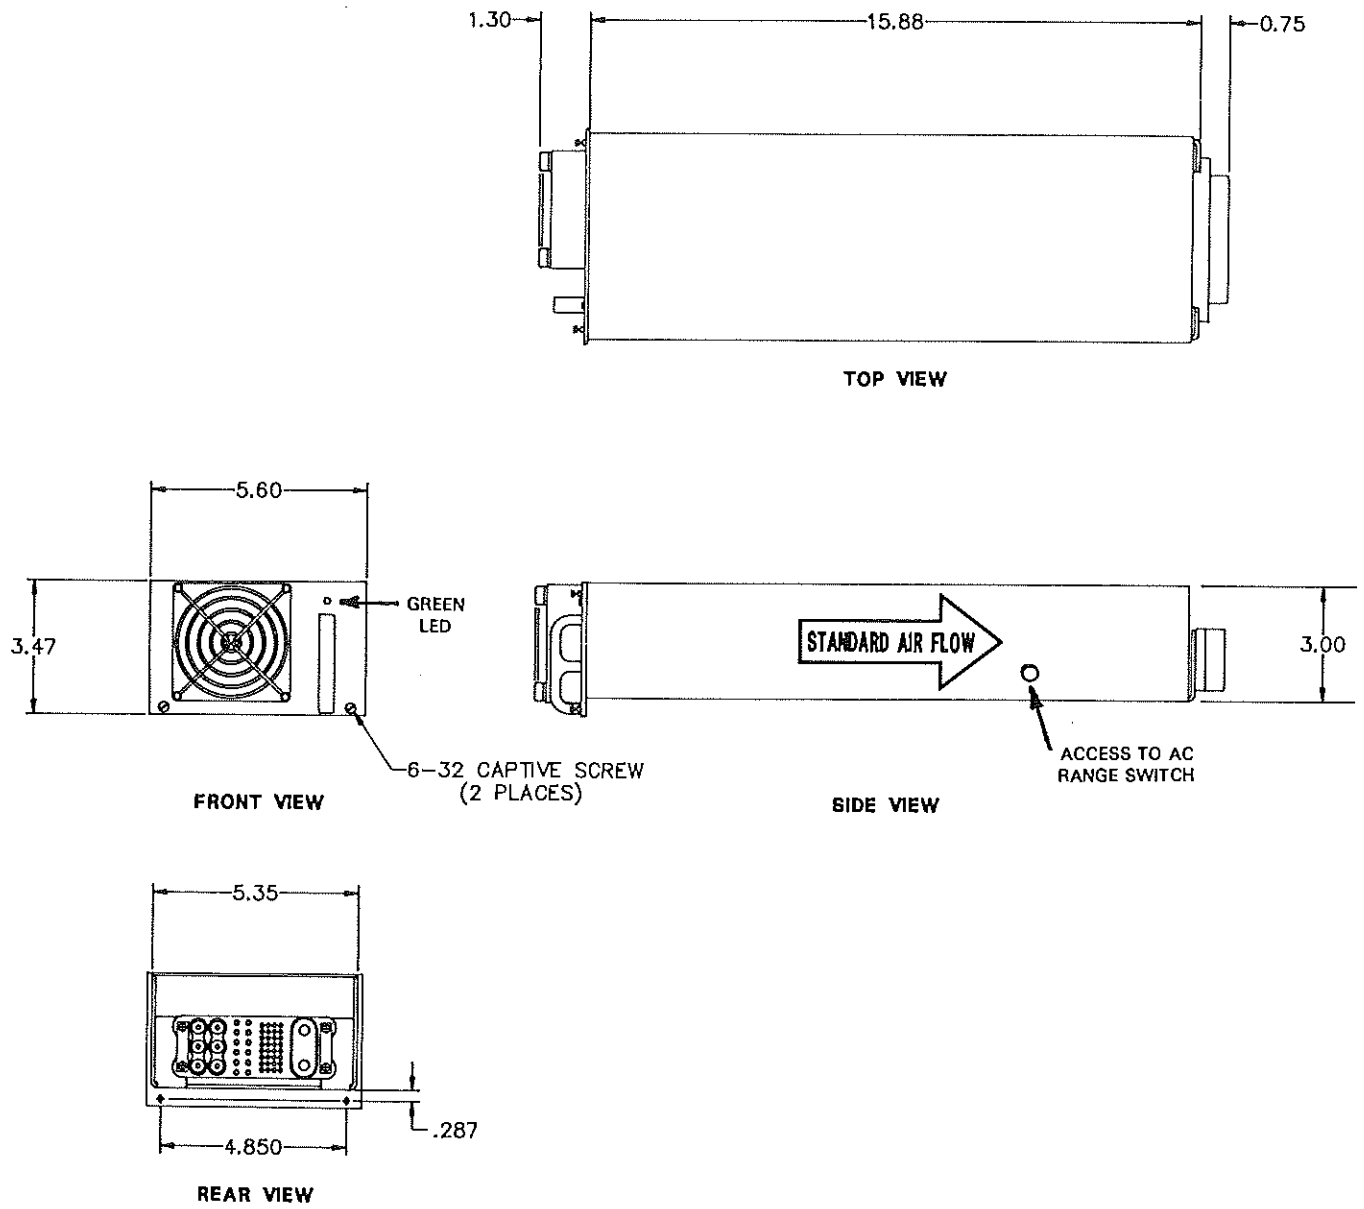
Outline Drawings for TP Series Hot-Plug Power Module
